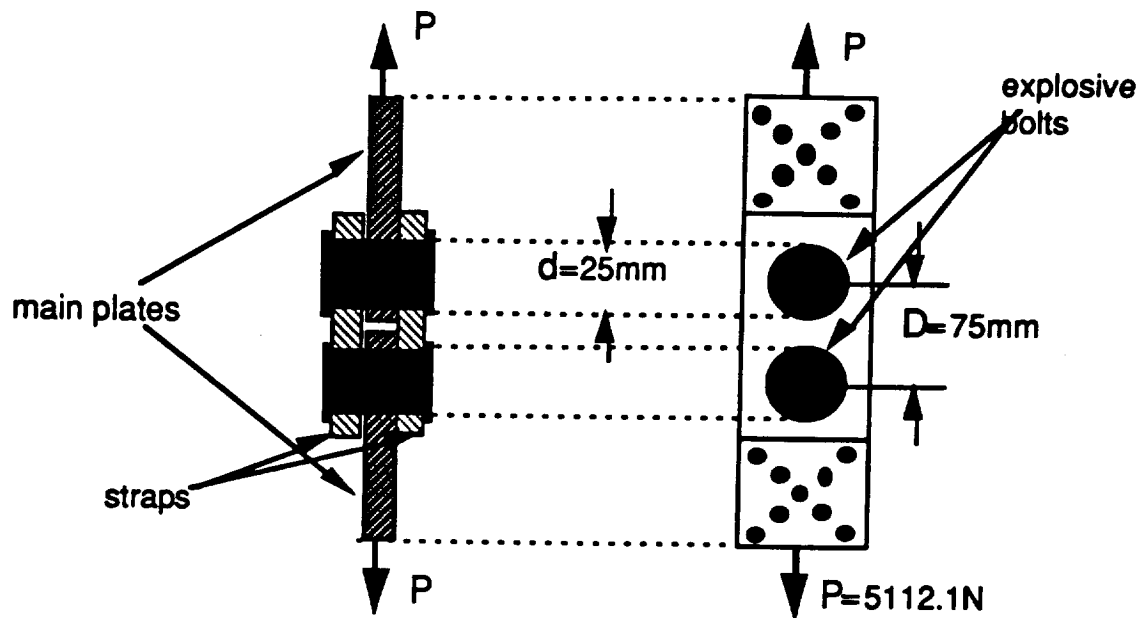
B: Side and Top View of the Butt Type Explosive Bolts
